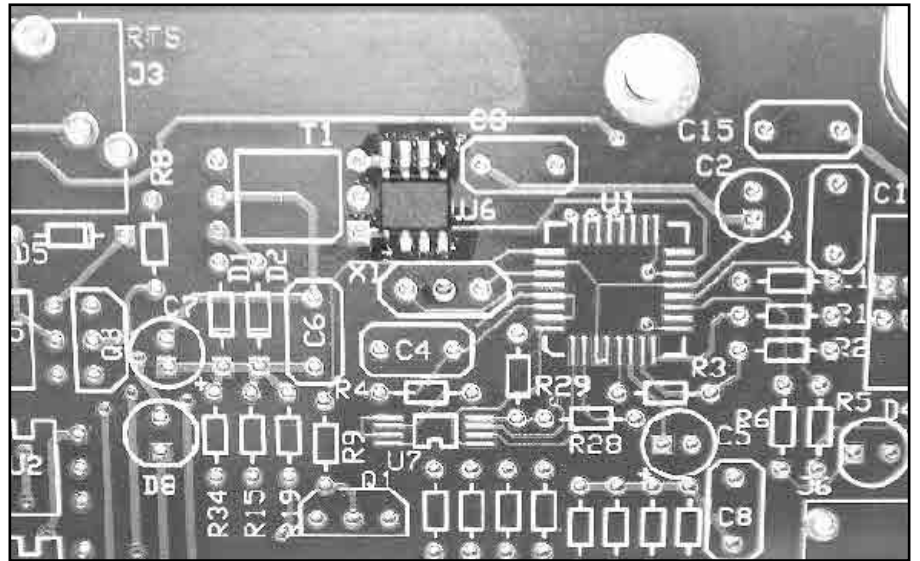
Place the MAX253 switching power supply IC, U6, on the circuit board first.
